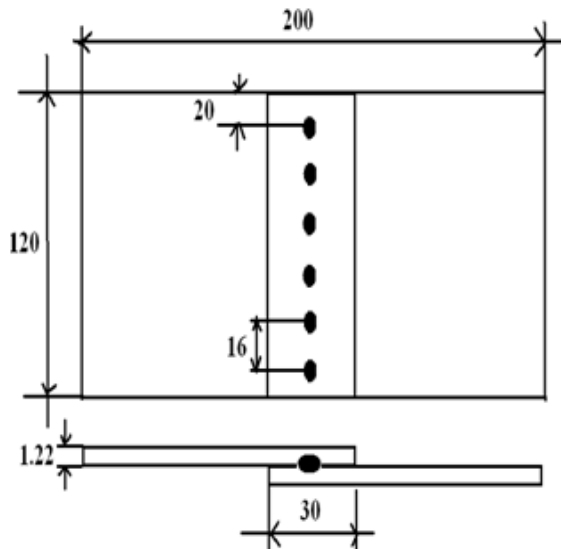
Dimensions of tensile-shear test specimens (not to scale, dimensions in mm).
